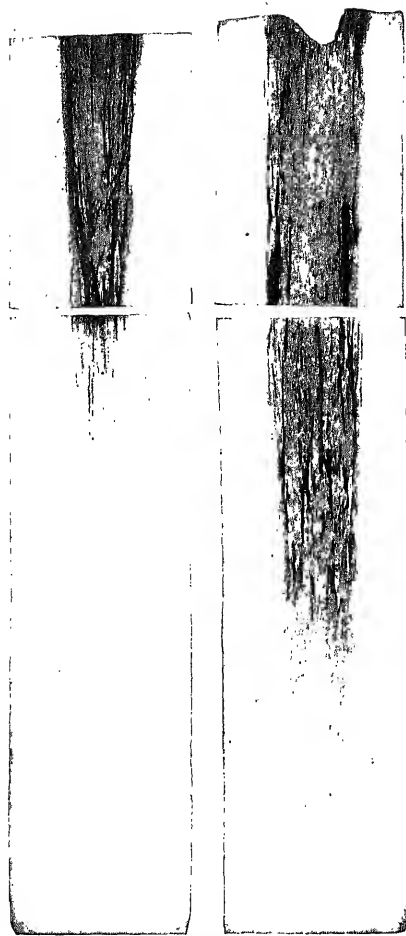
Wedge formation of the inner zone in boiler plate.
